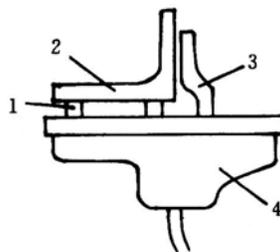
Inspection of perpendicularity of shift fork on transmission
